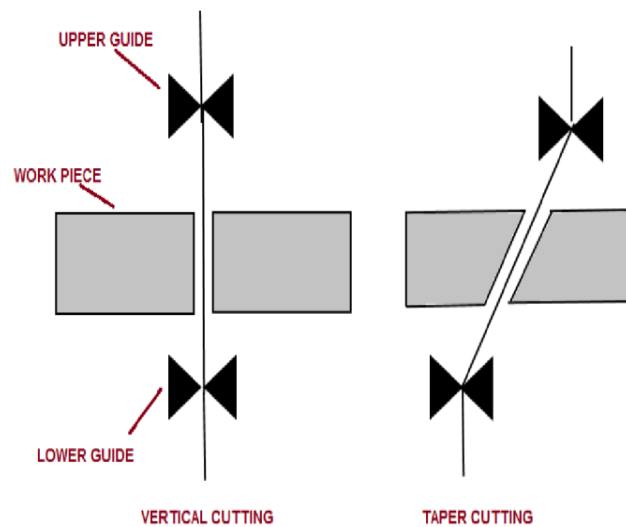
Wire EDM Vertical and Taper cutting [12]
